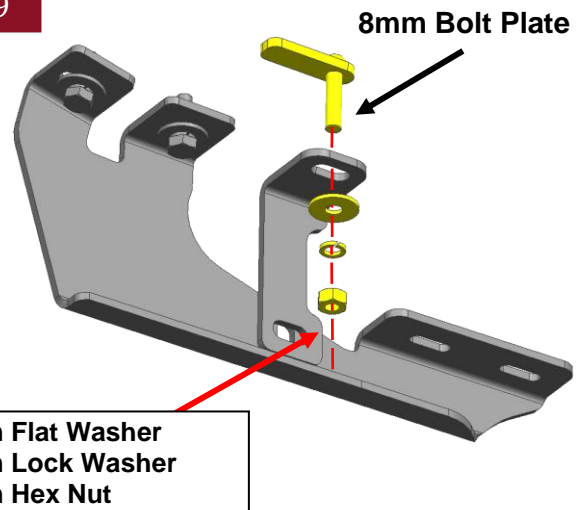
Insert 8mm Bolt Plate into outer hole in body panel (also see Fig 6)
